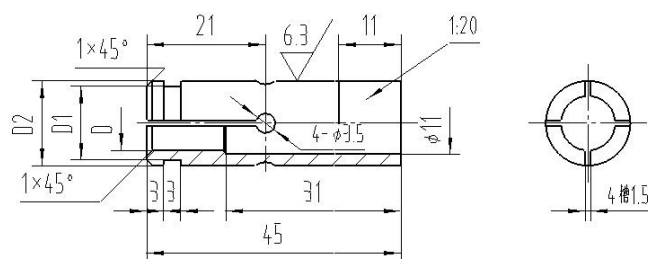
Welding torch Adjusting Sketch Drawing
